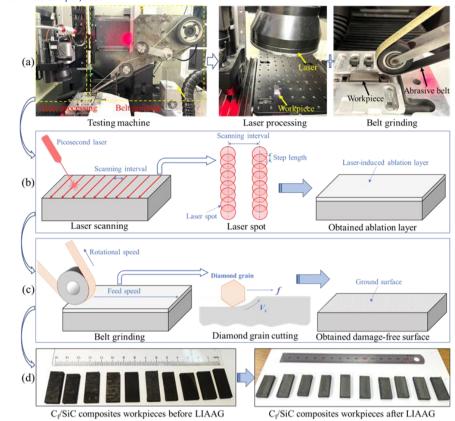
LIAAG procedures: (a) LIAAG testing machine, (b) laser-induced ablation process, (c) belt grinding process, (d) C_f/SiC composites samples before and after LIAAG.
